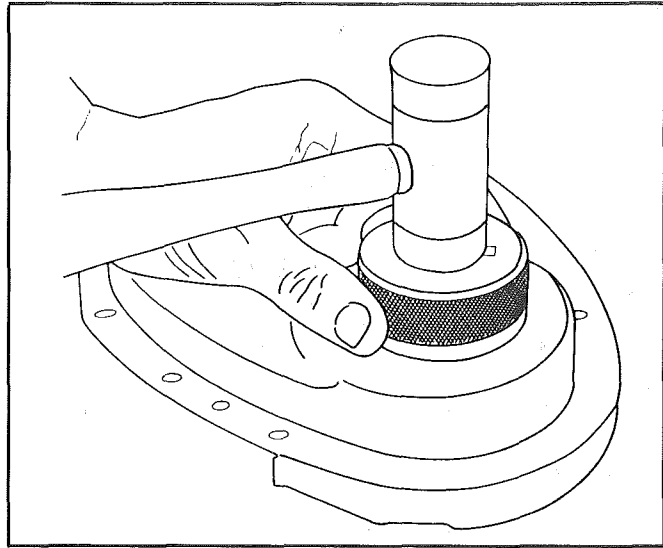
A3-28 Installing Oil Seal-Cover Removed
